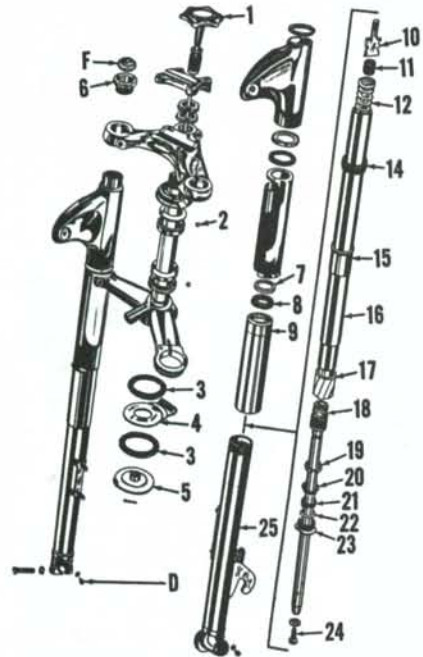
Exploded view of front fork typical of all 175 and 250cc models.
